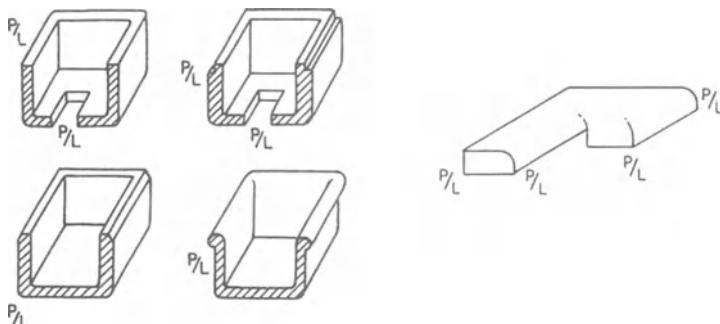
Four possibilities for locating parting lines on assembly parts, boxes, and covers while maintaining good aesthetics.
